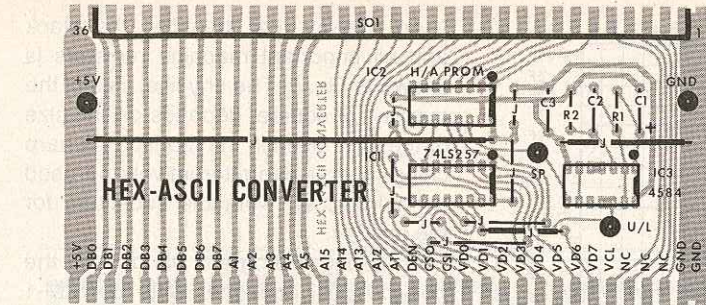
Actual-size etching and drilling guide (right) and component layout (above) for the pc board. The board is connected between the TVT-6 and the KIM-1 microcomputer.
